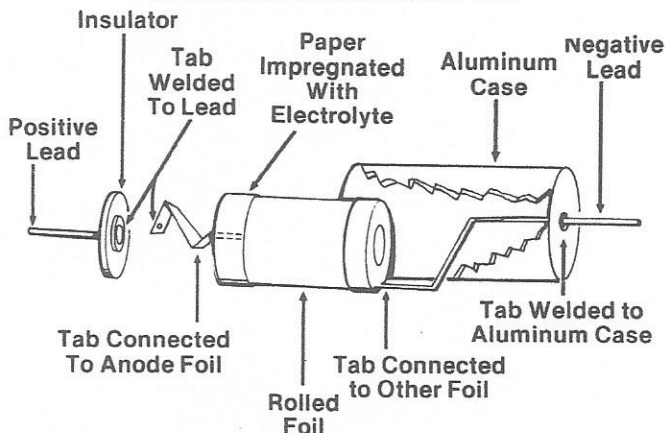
An electrolytic can become intermittent due to a poor or corroded weld.
